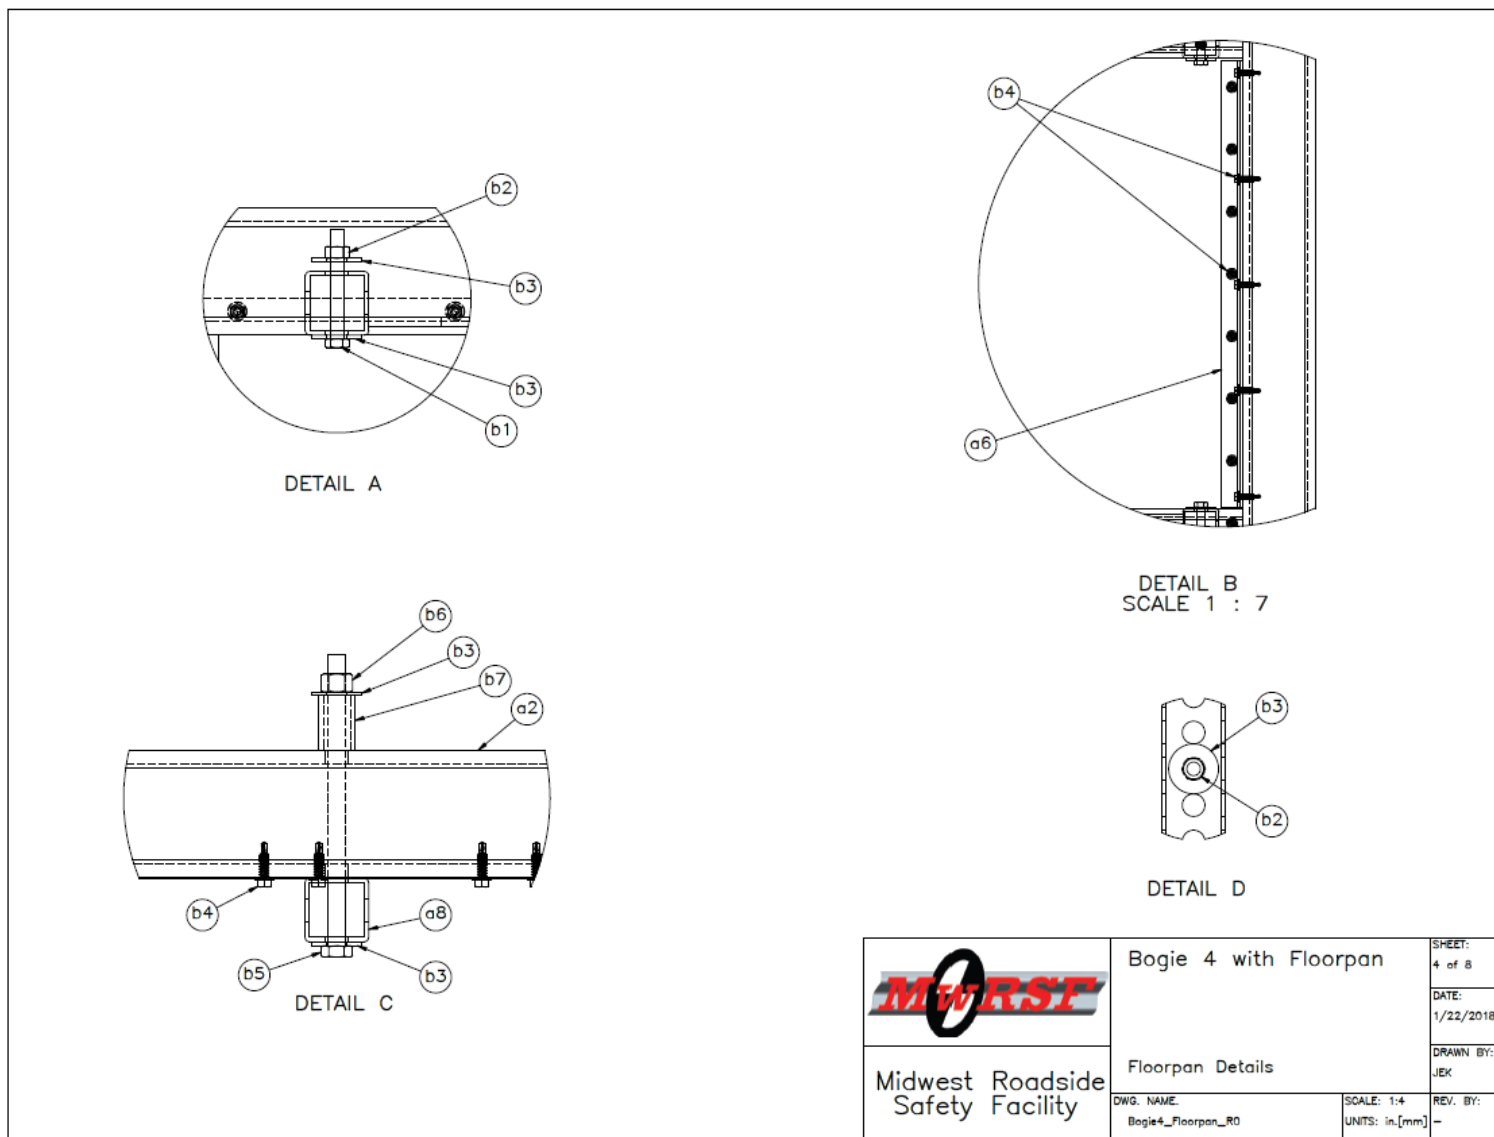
Floor Pan Details, Test Nos. MWFPF-22 through MWFPF-26
